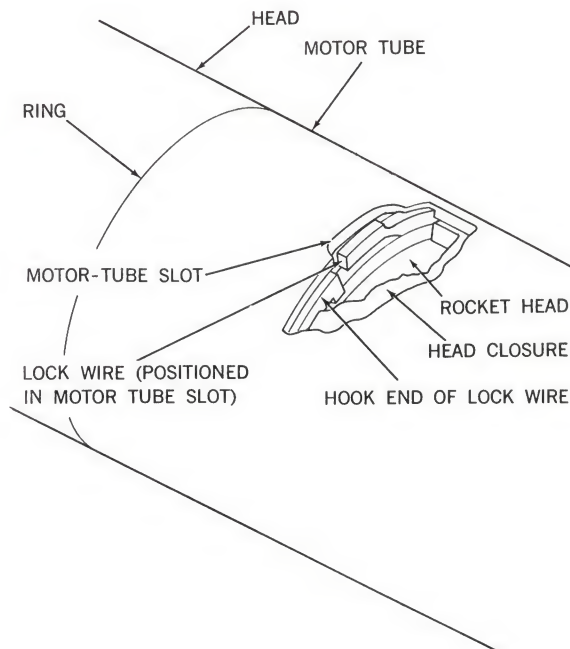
2.75-Inch Rocket Motor Tube Lockwire Slot, Cutaway View.
